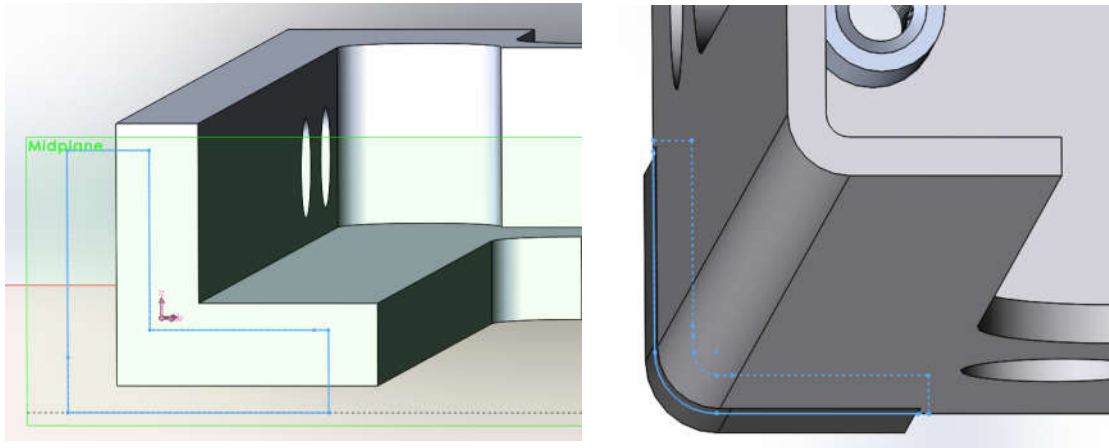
Structure Rail Sections for Sidepanel (L) and CubesatKit (R)
